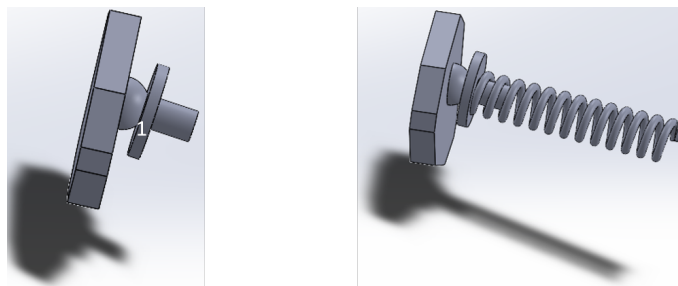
3D modeling of the mechanism that pushes the suturing elements with rotary joint and new surface (1). Side view.
